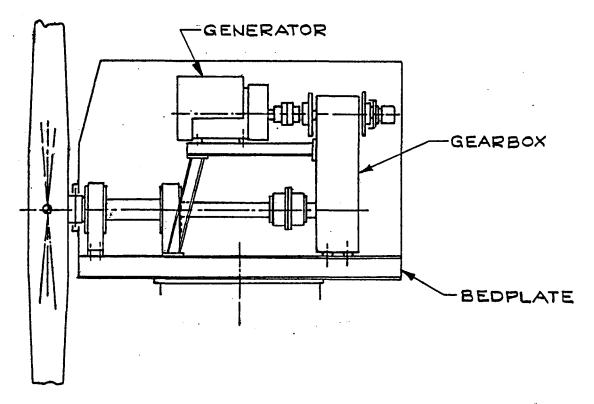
Concept 7: Gearbox mounted on far side of rotor and no tilt in the bedplate
